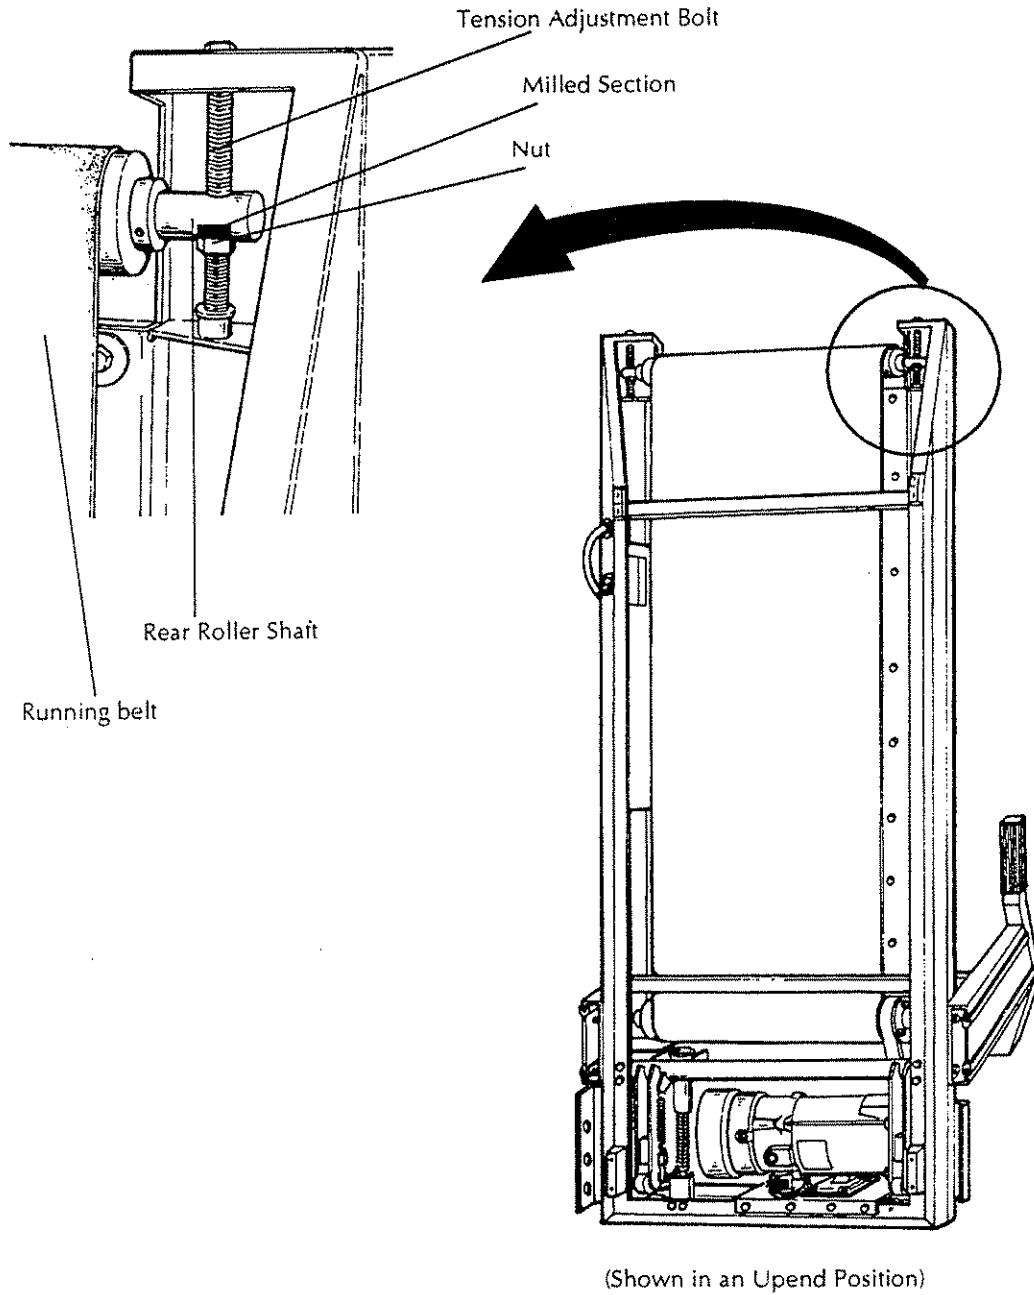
Removing/Replacing the Rear Roller Assembly
